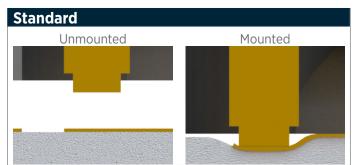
Trace deformation caused by standard Compression Mount PCB Connectors
